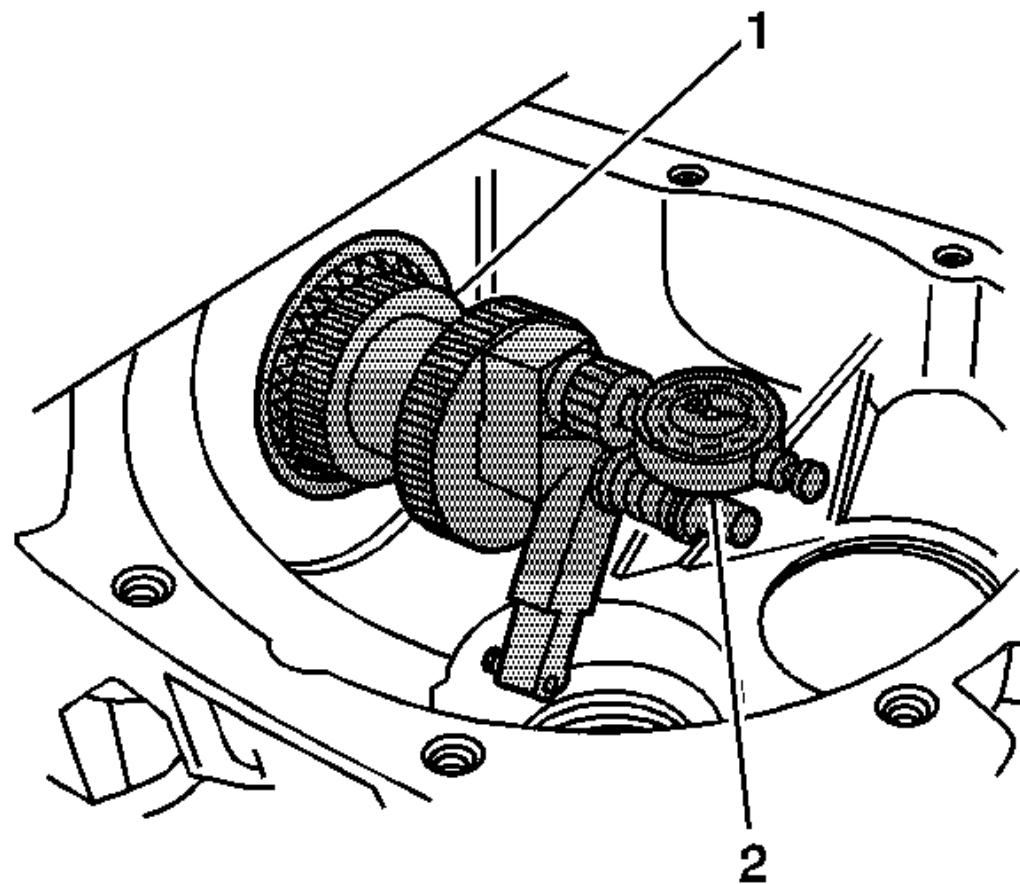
View Of J 36601-3 & J 29763 In Differential Side Bearing Bore
